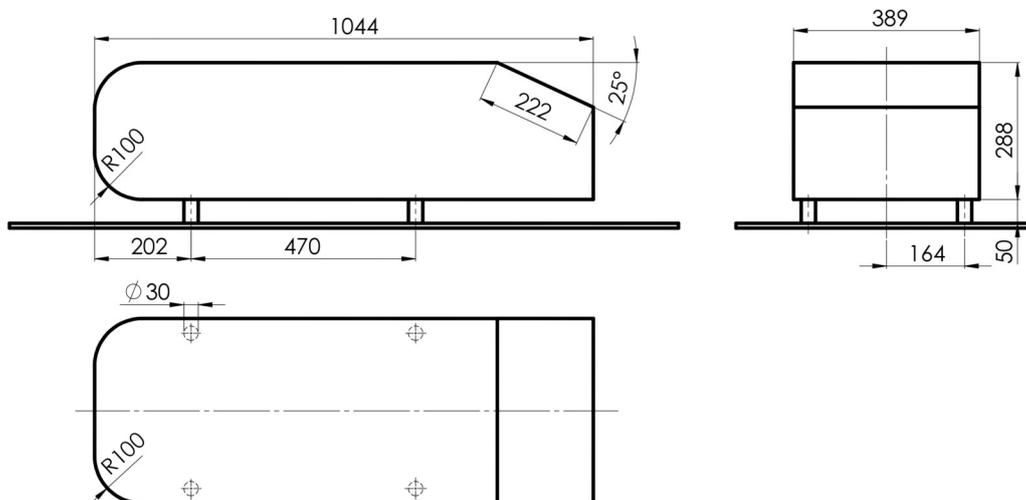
Ahmed body schematic drawing considering its main dimensions.
